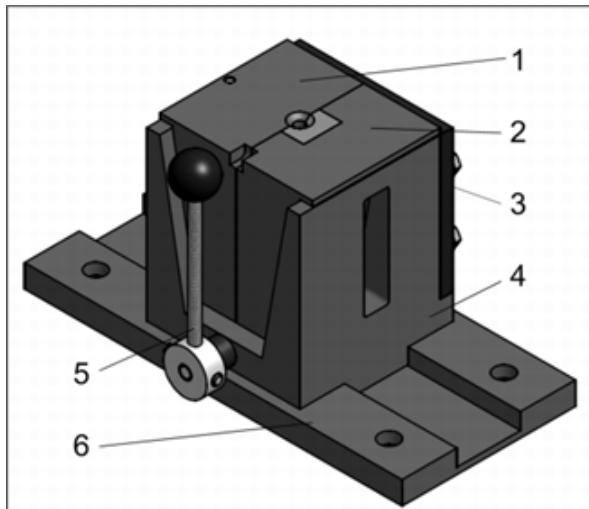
Injection mold with a sight-glass: 1—molding insert, 2—molding insert with a sight-glass, 3—light fitting, 4—clamp, 5—lever, 6—base plate
